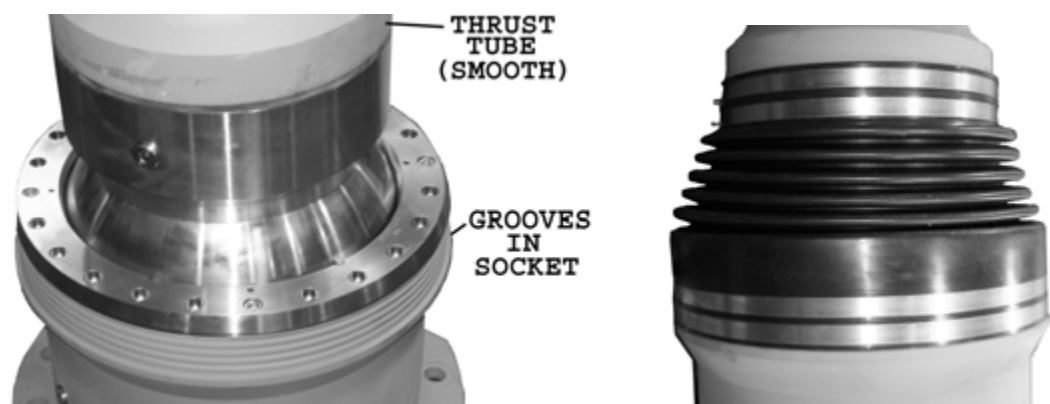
Install Boot Over Output Placing Ribs In Boot In Socket Grooves
